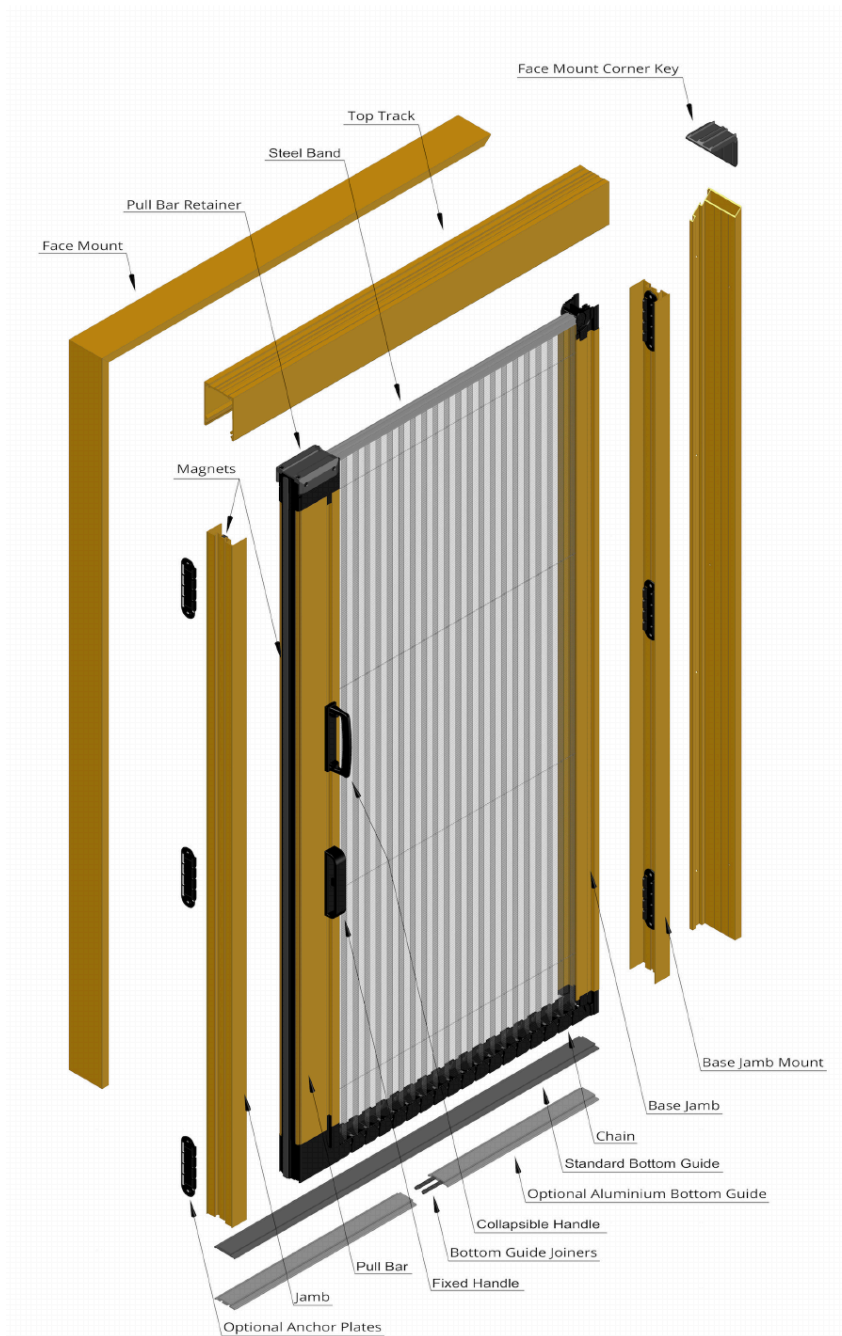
ST CARTRIDGE — FACE MOUNT, EXPLODED
